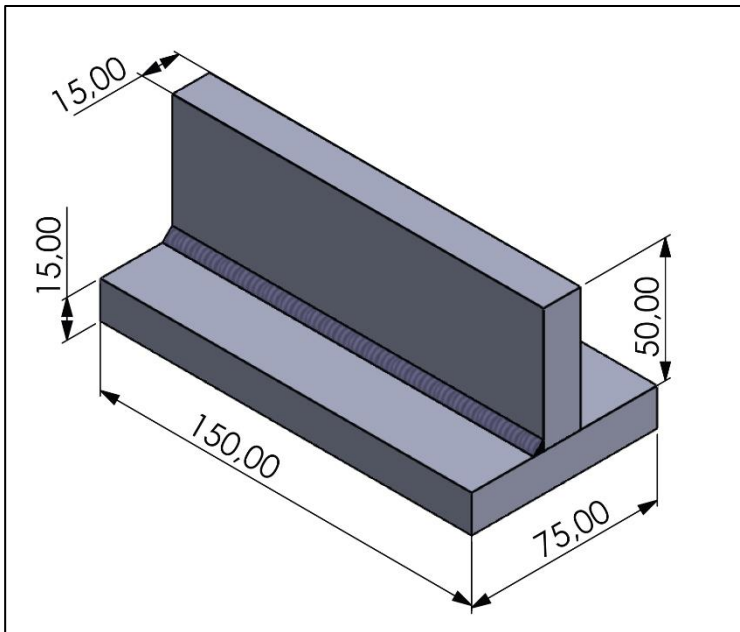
Fillet seam at the T-joint; CAD model; Source: HWK-Ko
